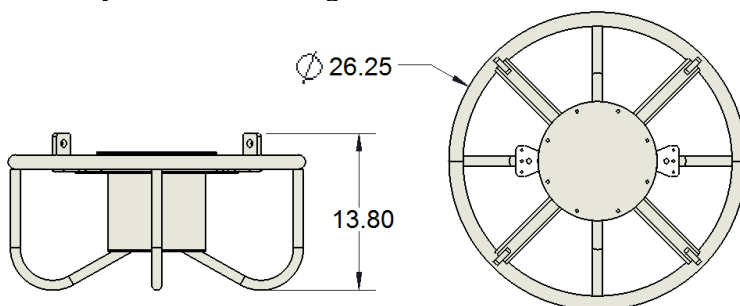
Side and Top View of the 4 Hook Carousel Cage (C2-4HC) shown without hooks.
